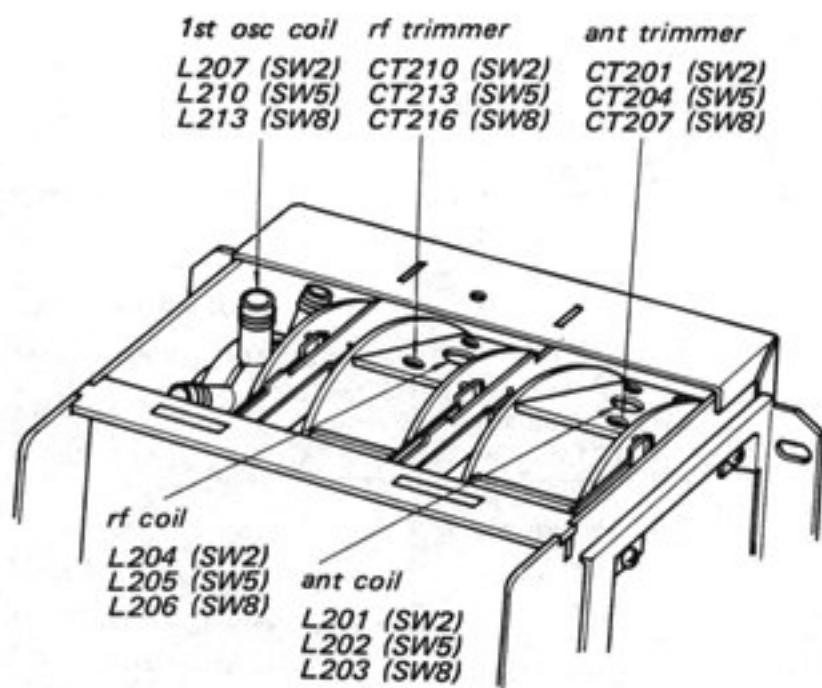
Adjusting parts for SW2, SW6, SW8
